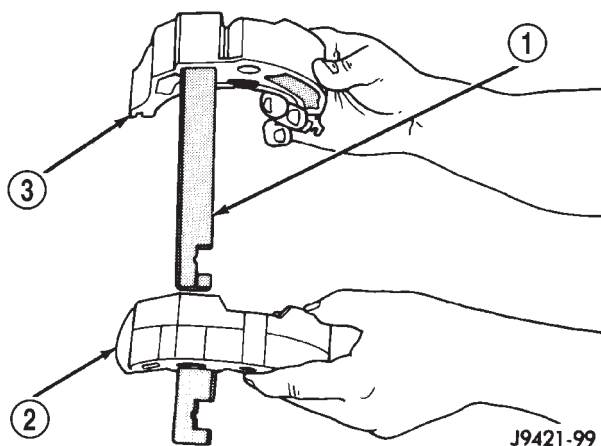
Assembling 1-2 And Fifth-Reverse Shift Forks
